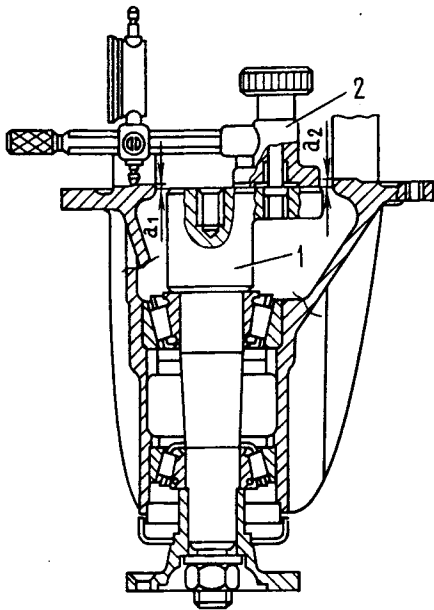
Taking Measurements to Determine Thickness of Drive Pinion Adjusting Ring:
